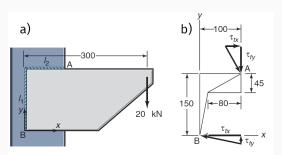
Welded bracket: (a) dimensions, load, and coordinates; (b) torsional shear stress components at points A and B.
